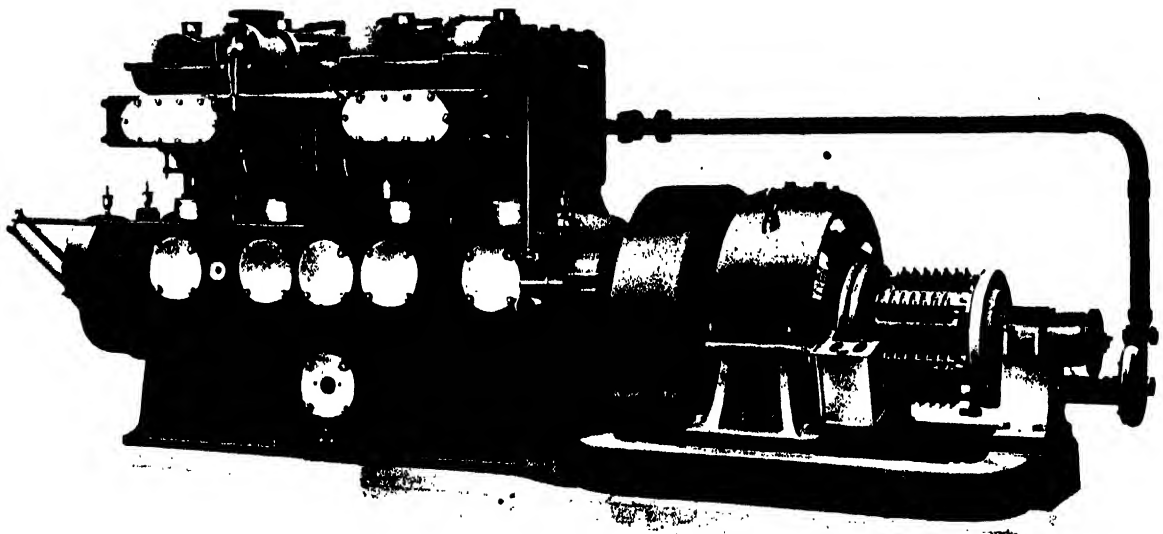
Fielding Gas Engine. Vertical Enclosed Four-cylinder Type, 180 B.H.P.
